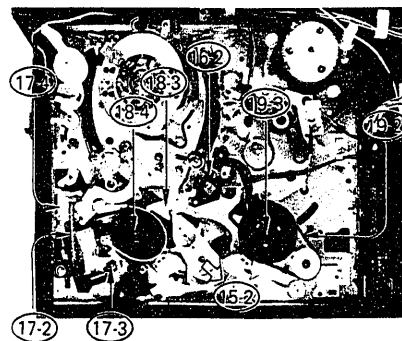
Reel Drive Idler, Tension Band/Tension Arm, Reel Disk
